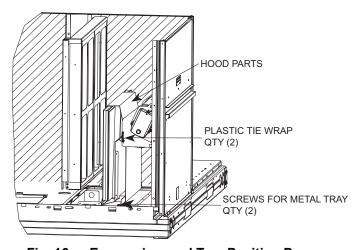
Economizer and Two-Position Damper Hood Parts Location
